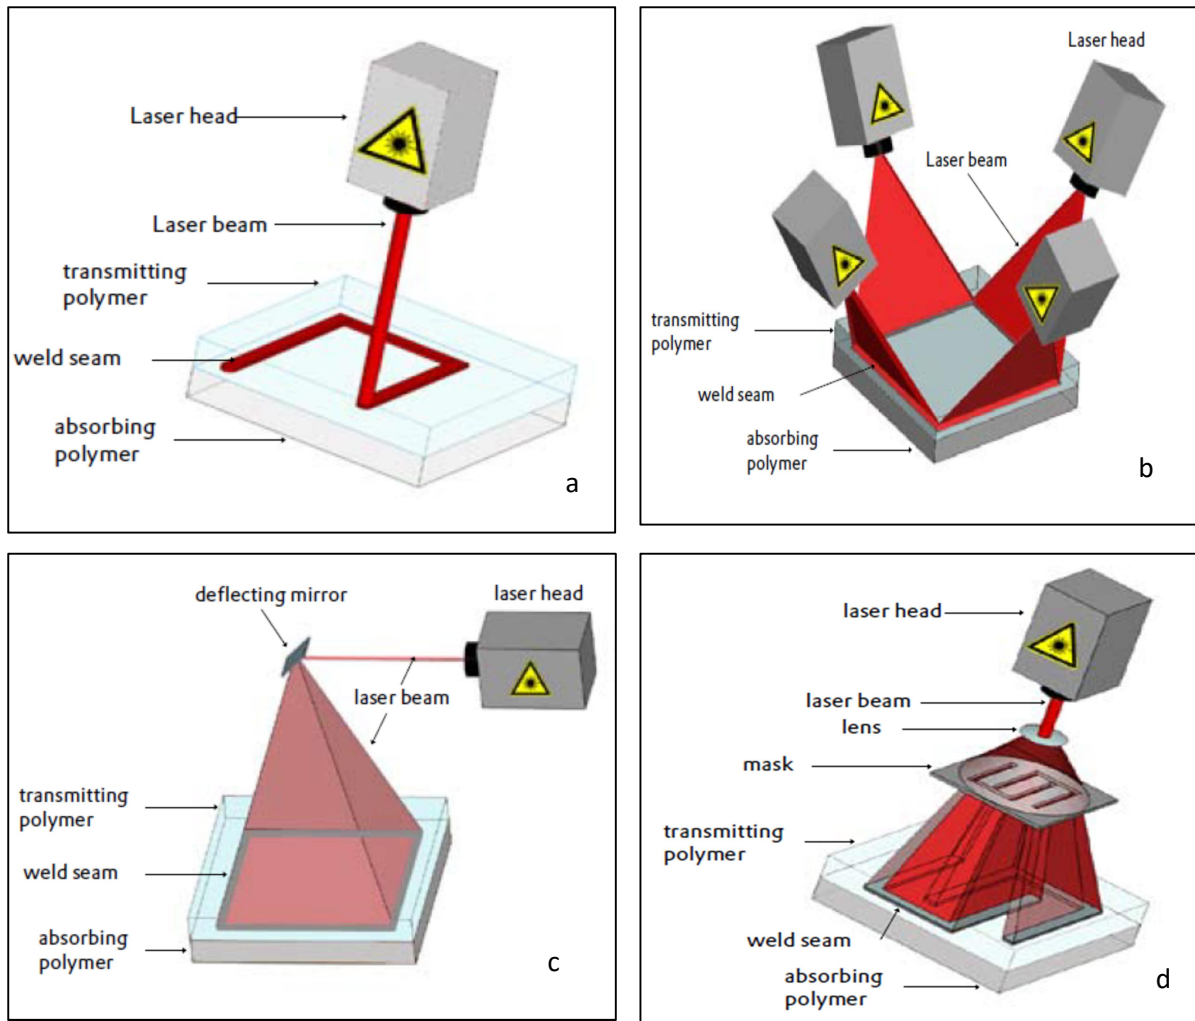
Pictorial views of (a) Contour welding, (b) Simultaneous welding, (c) Quasi simultaneous welding and (d) Mask welding
